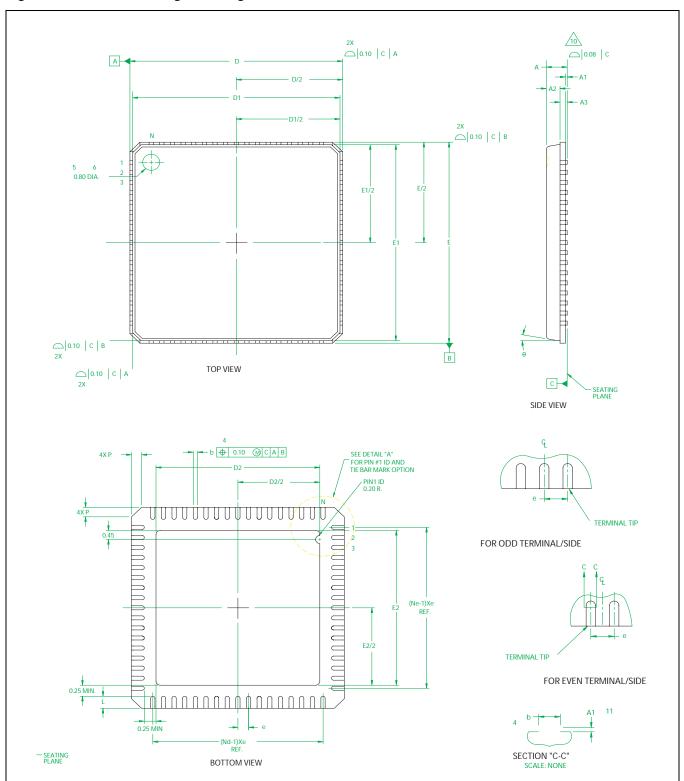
shows the package outline drawing for the 68-pin 10 mm x 10 mm MLF package (Note: See Figure 2-8 for dimensions of 72-pin package).
